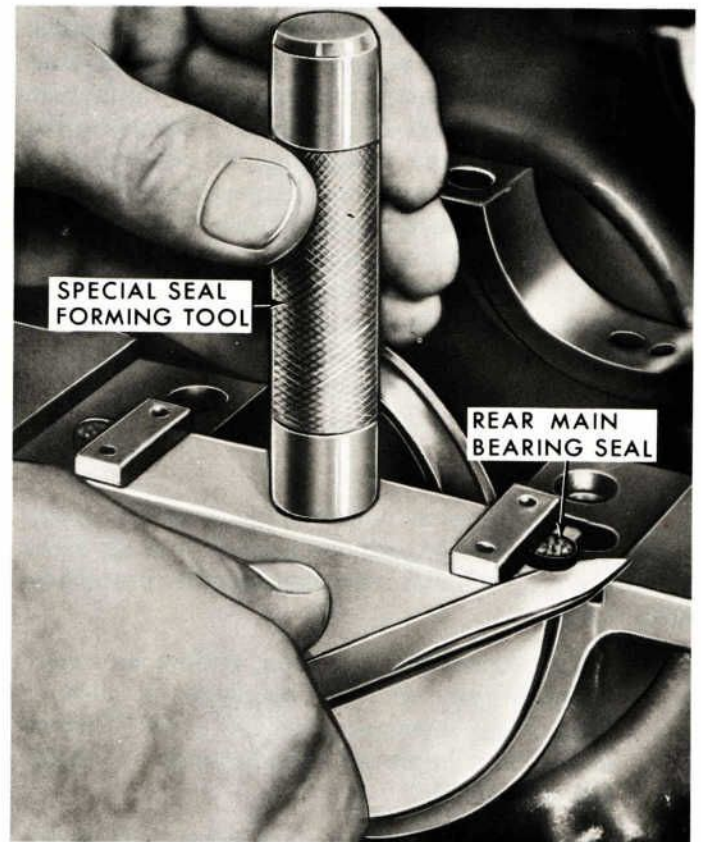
REAR OIL SEAL-TO-BLOCK INSTALLATION
